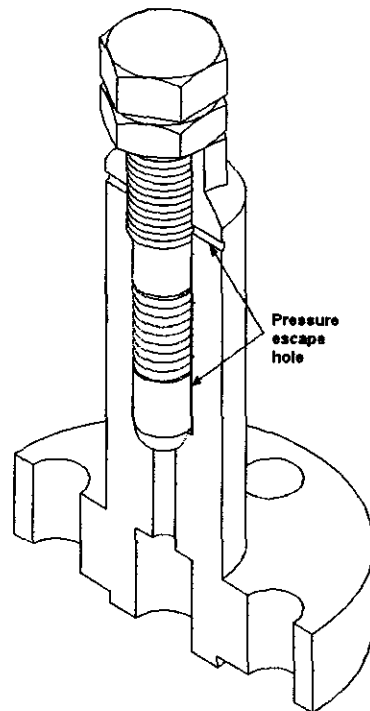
Sectioned pressure relief valve model (Appendix 7: drawing group INST_PRV)
